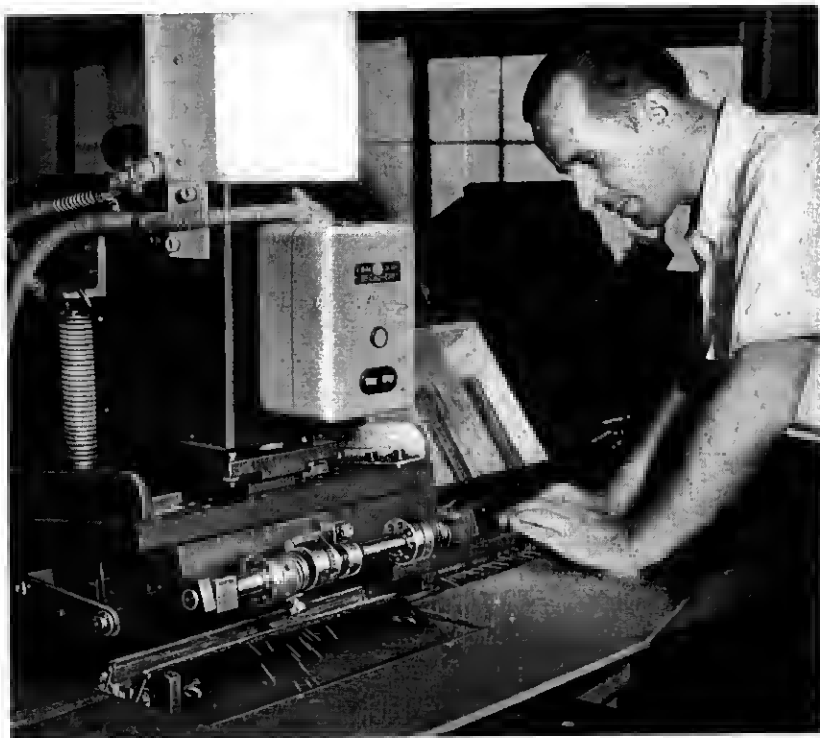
Operator preparing to feed assembly jig to machine where heated shoe imbeds terminal leads of components into the thermoplastic strips. Cuttings from sheared off terminal leads may be seen below machine.
